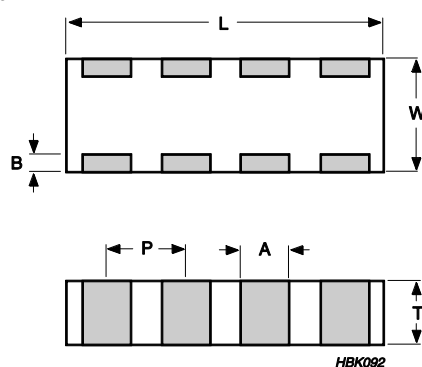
Surface mounted multilayer ceramic capacitor dimension
